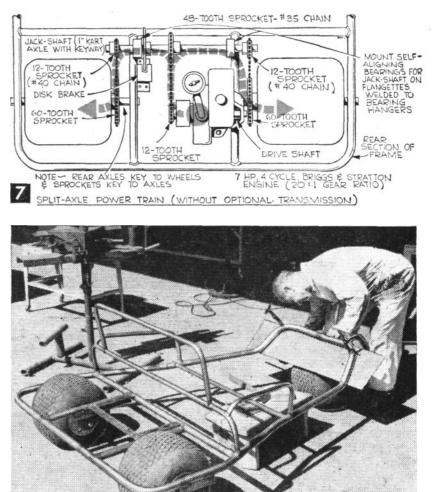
Clamp piece of floor steel to frame to check 45° turning angle.
